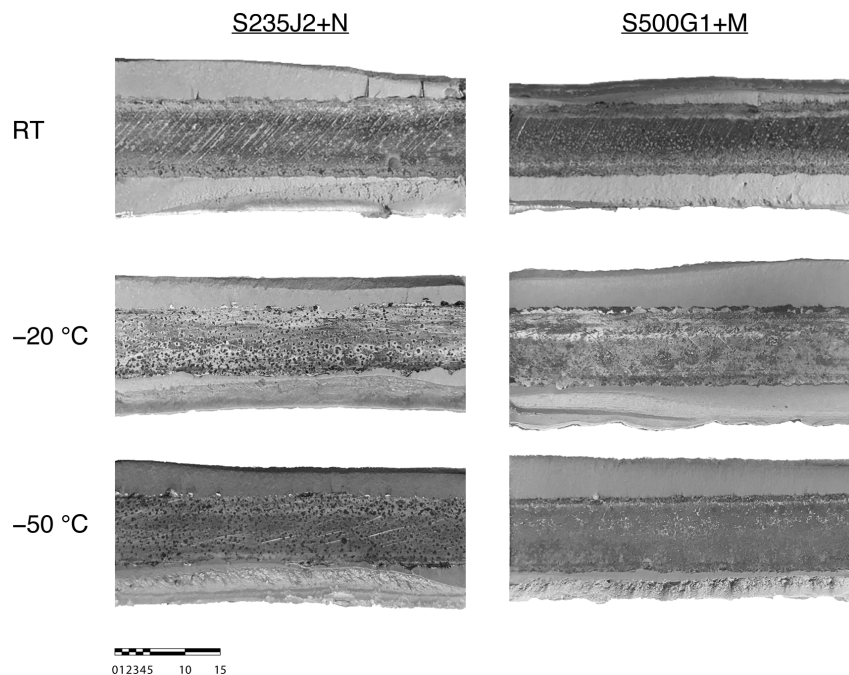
Fracture surfaces of cruciform joint specimens with non-fused plate edge in the middle between the fractured welds (scale in millimetres), adopted from Braun et al. (2020a)
